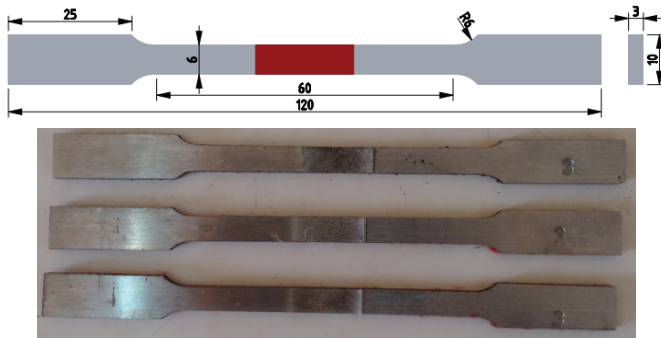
The geometry of the tensile specimen (ASTM E290), dimension in mm.
